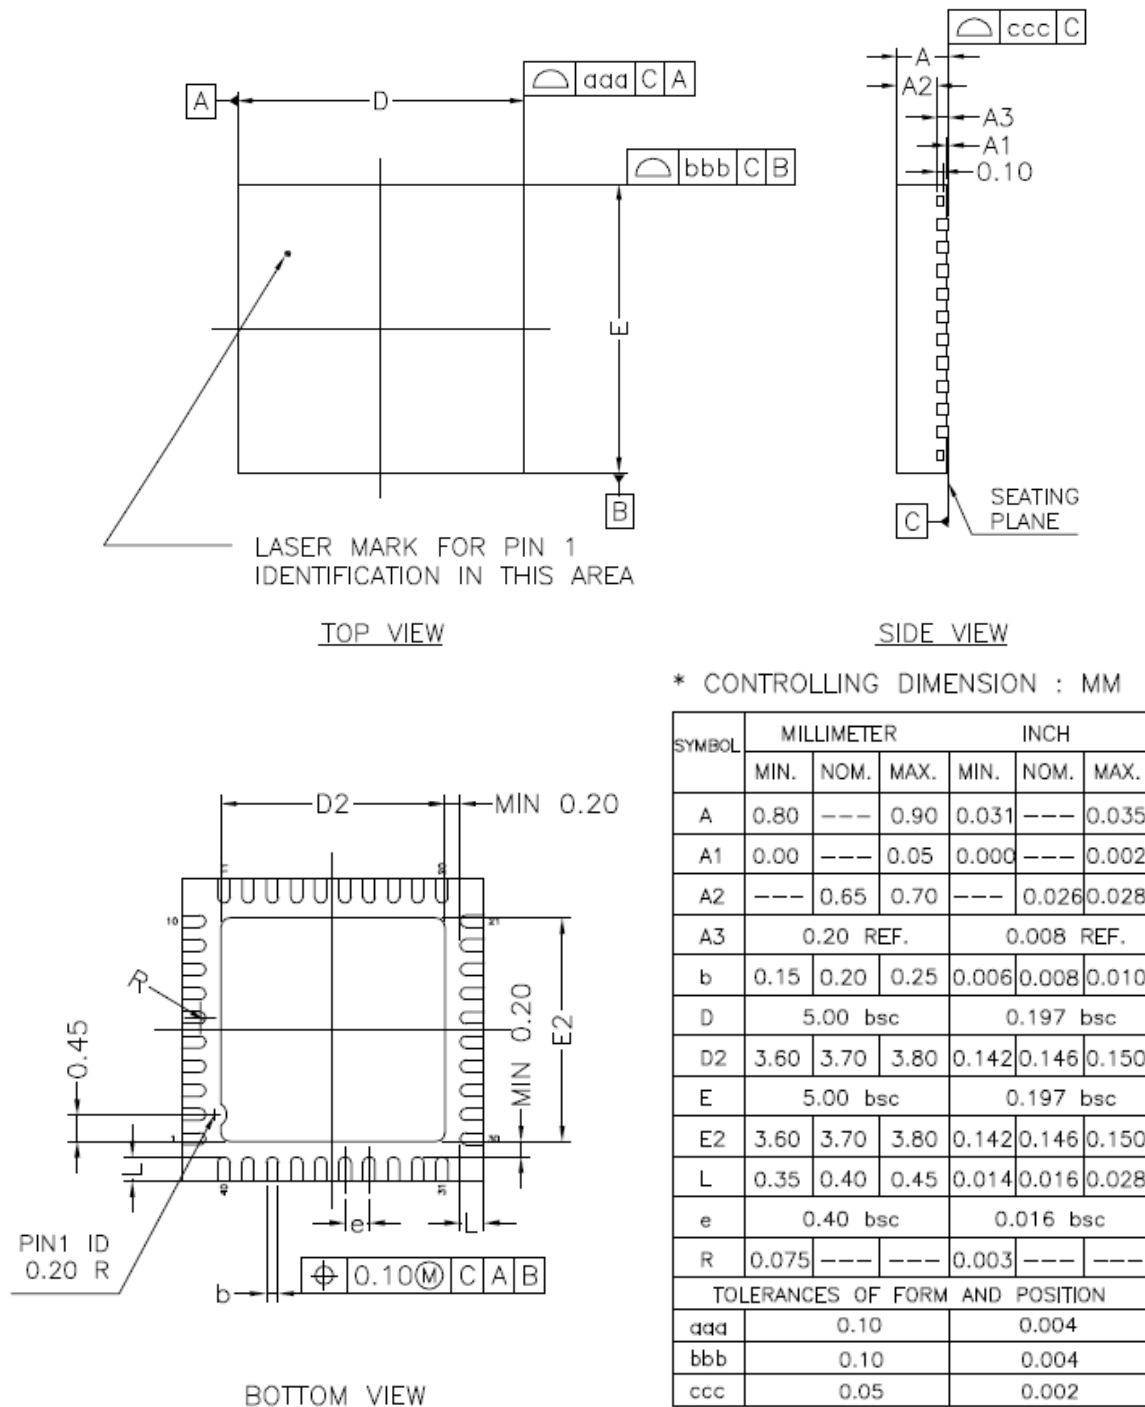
Package outline and dimensions of QFN40 5mm x 5mm, 0.4mm pitch Package
